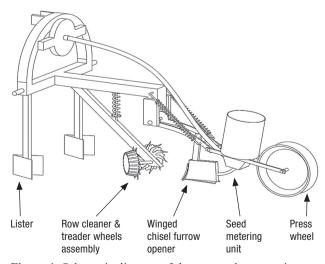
Schematic diagram of the mounted pneumatic rowcrop planter equipped with row cleaner & treader wheels and winged chisel furrow opener used in this study.
